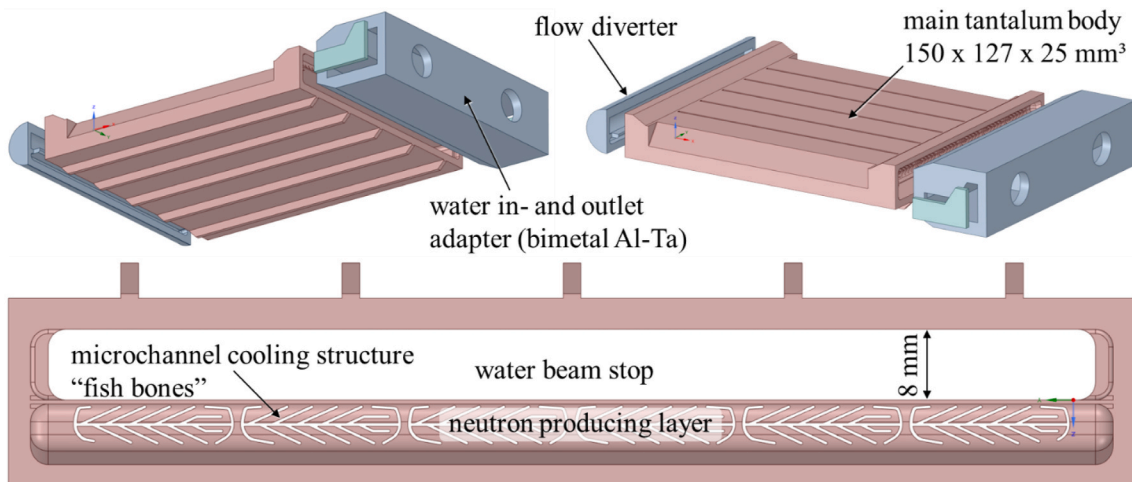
Design of HBS tantalum Target. Upper figure: isometric view of model front and back side, lower figure: detailed view of microchannel cooling structure and beam stop
